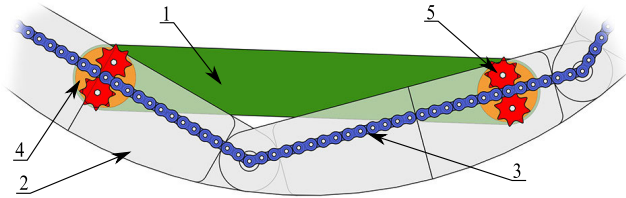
Drives on platform. 1. Platform, 2. Modules, 3. Roller chain, 4. Sprocket module, 5. Sprocket.
